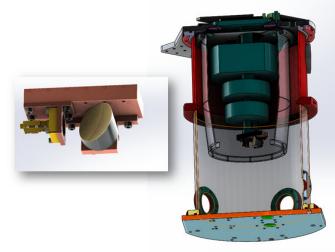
A cartoon rendering of the cryocooler cold head enclosed in the vacuum jacket (right) showing how a mixer assembly (with integrated amplifier) might be attached to the 6 K cold finger. For single pixel operation, this is the simplest configuration; for multiple-pixel operation, the amplifiers would be placed on the 3^{rd} or even the 2^{nd} stage.
